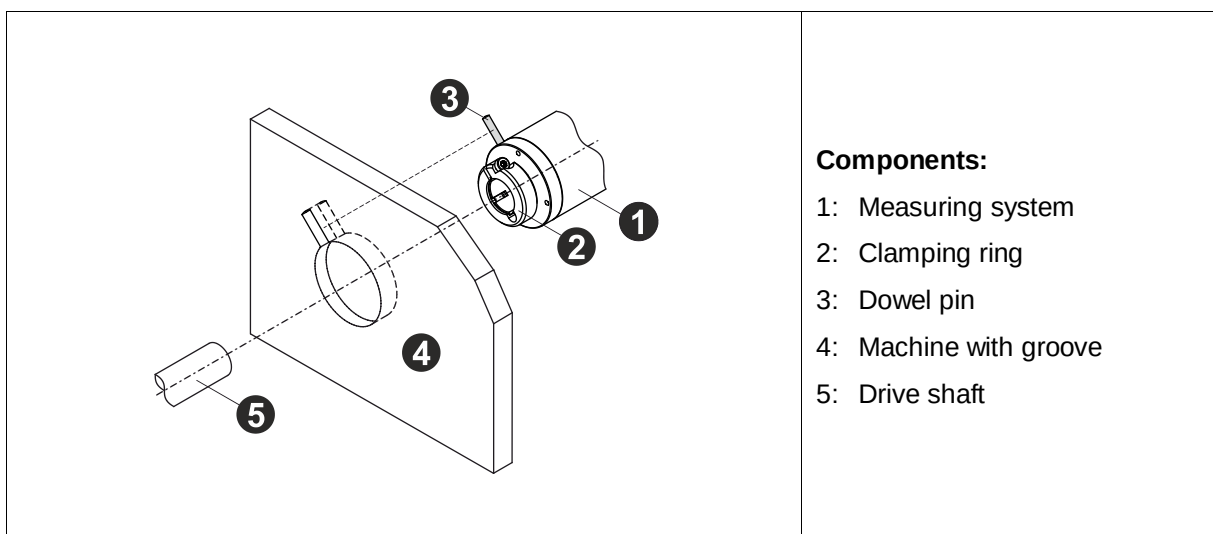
Mounting with lateral dowel pin and customer-side groove, principle illustration
